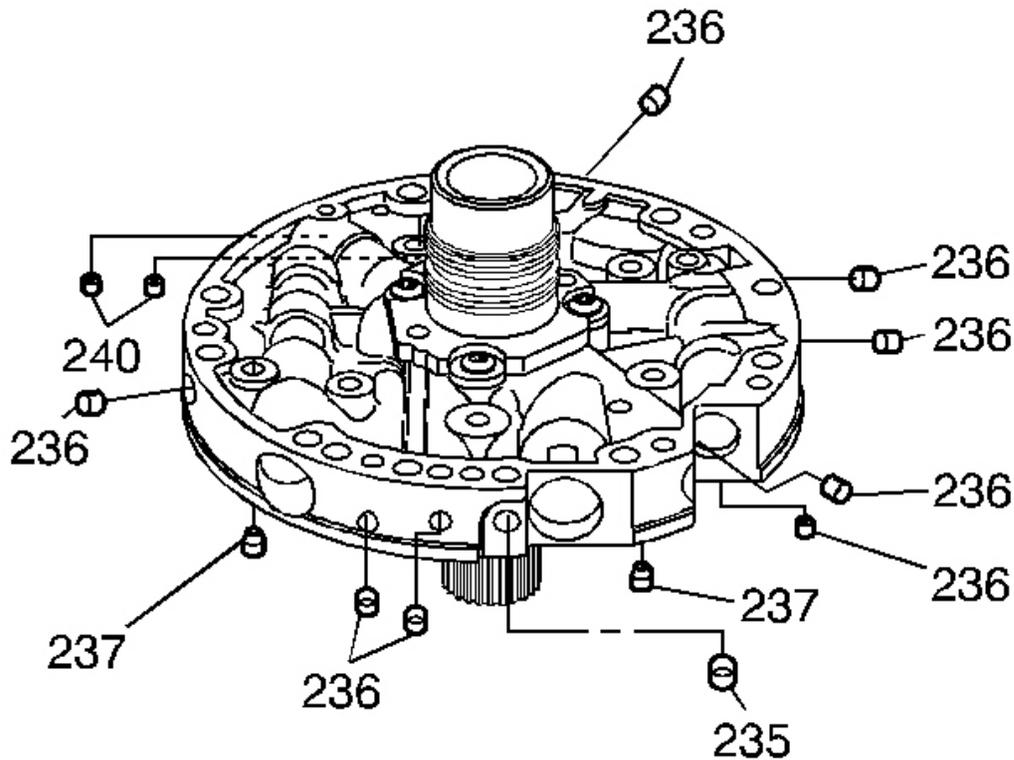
Pump Cover, Check Valve Retainer, Ball Assemblies, Cup Plugs & Orificed Cup Plugs
